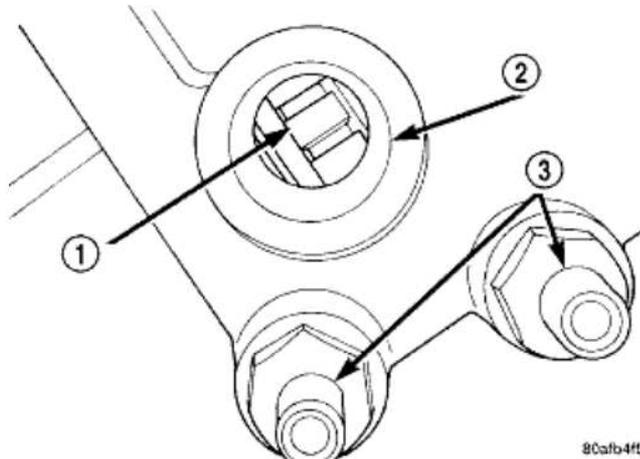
Verifying Proper Seating Of Input Clutch Assembly
